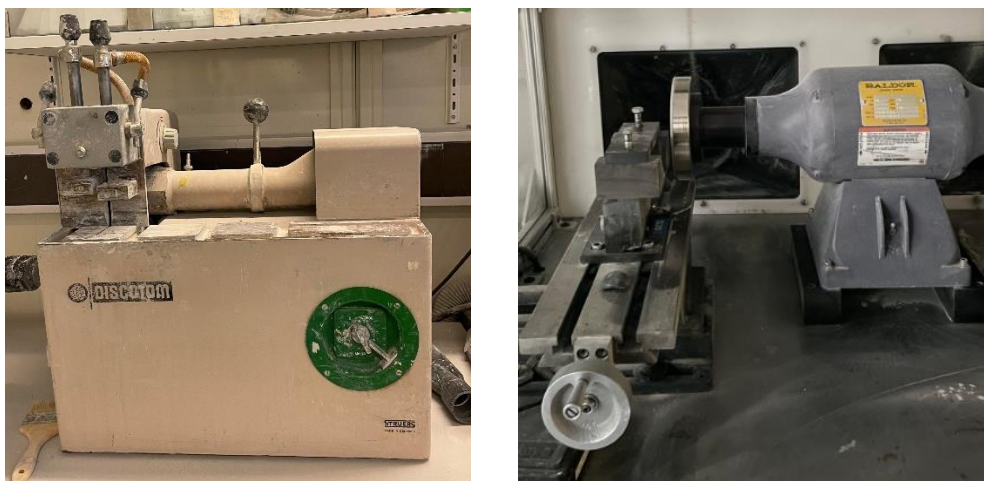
Cutting machine (left) and grinding machine (right)
